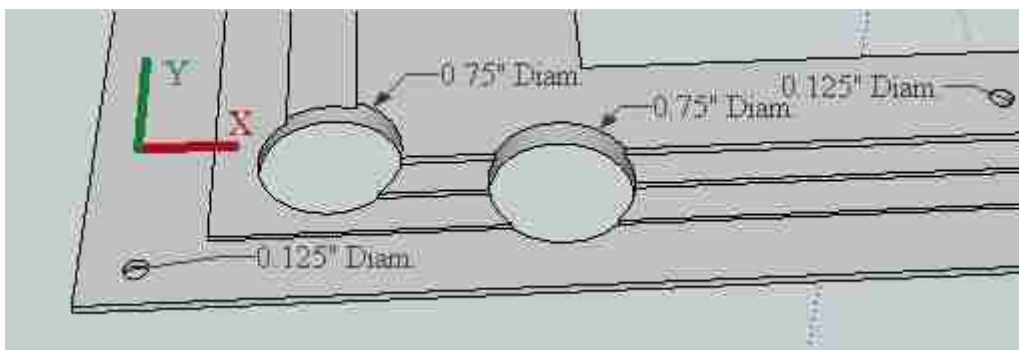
Orthogonal view of the 10x10 cm² upper trimmer lead plate illustrating hole dimensions.
